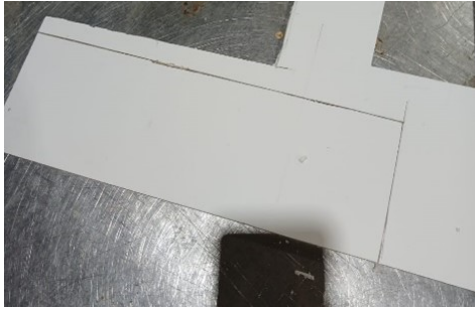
Close-up of a PVC foam board with dimension lines sketched using pencil.
